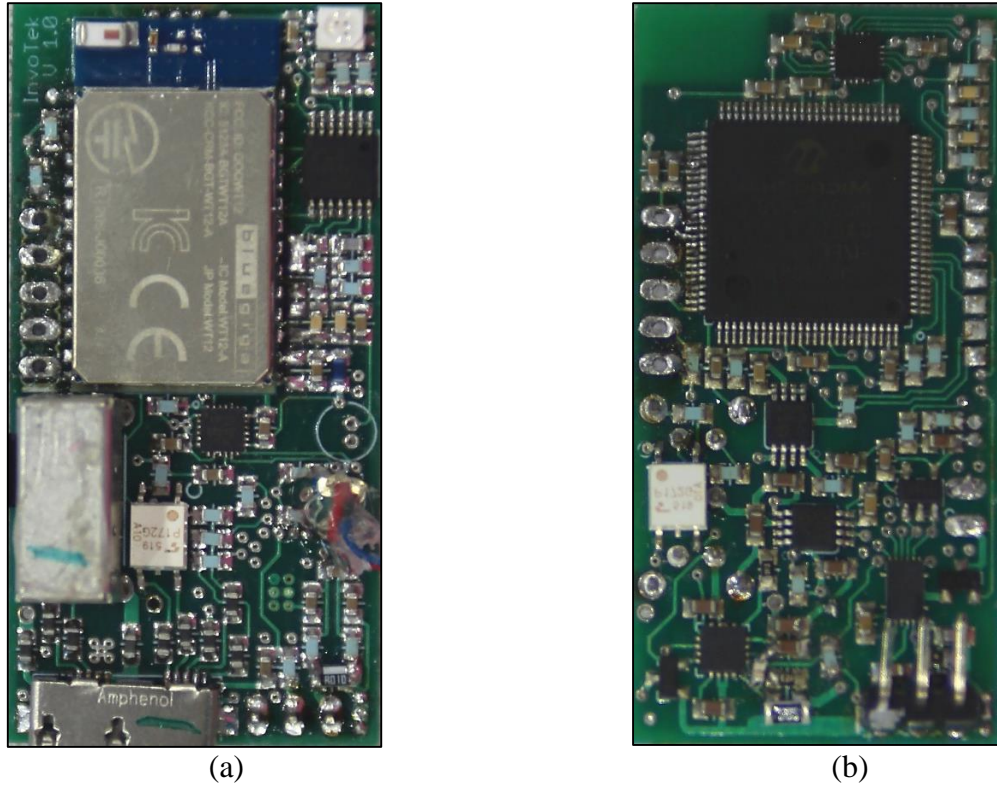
Populated PCB: (a) Top Side and (b) Bottom Side
